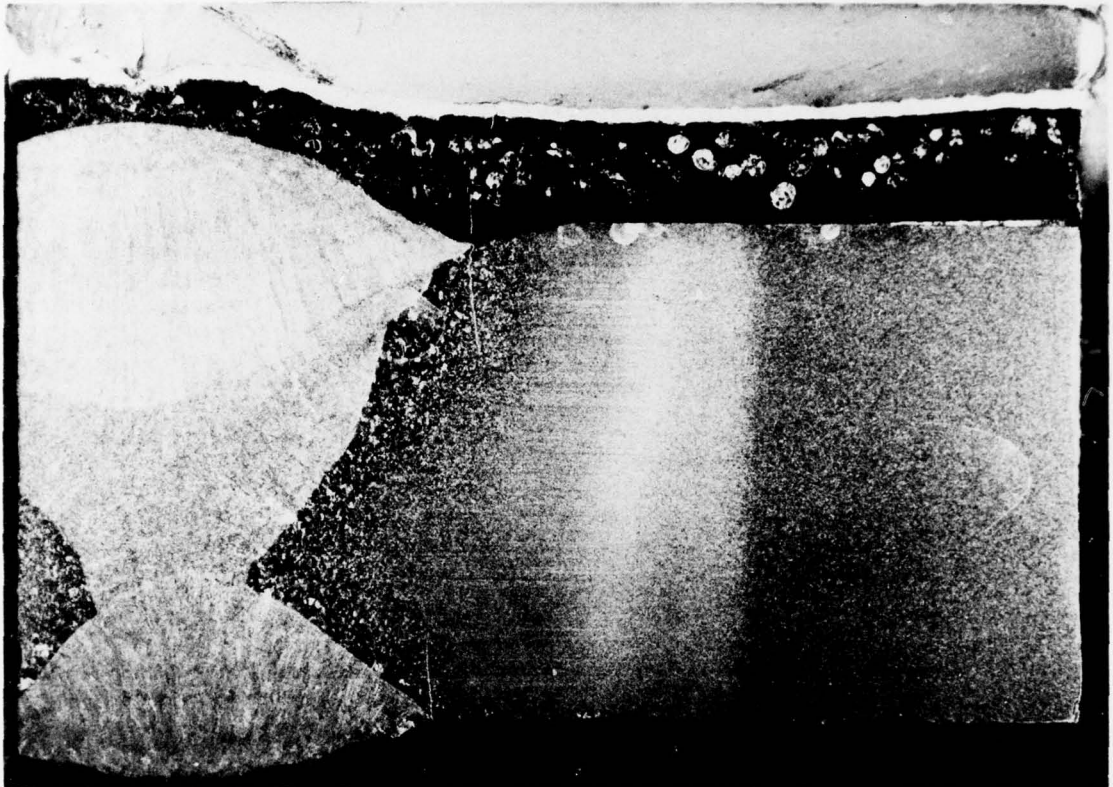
Section through HY130, E12018 welded, fatigue specimen from series 4, showing cracks initiating at edge of weld bead. (10x)
